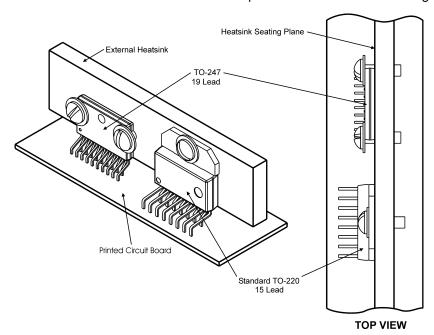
External Heatsink and PCB Leads Alignment Seating Plane Mounting Figures are for Illustration Purpose Only
